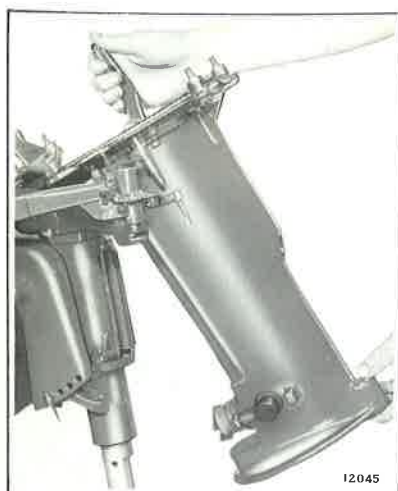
Removing Exhaust Housing from Steering Bracket
